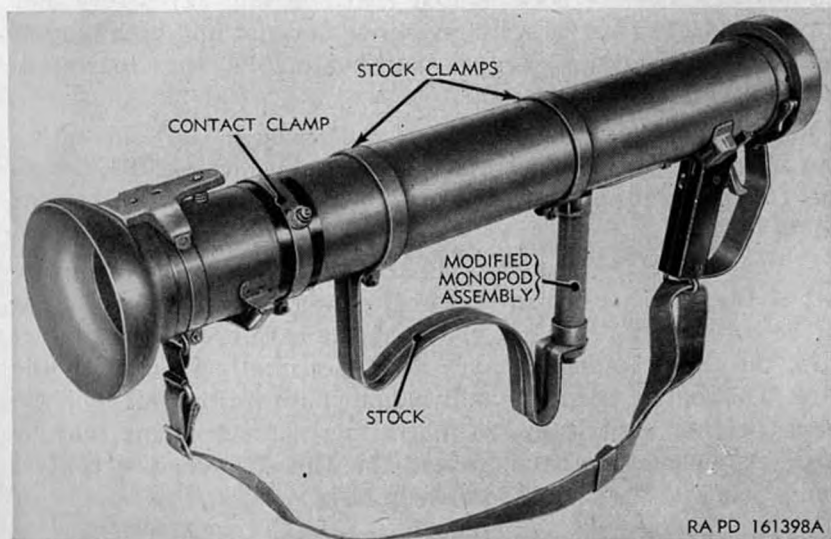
Rear barrel M20 (early manufacture)—right-side view.
